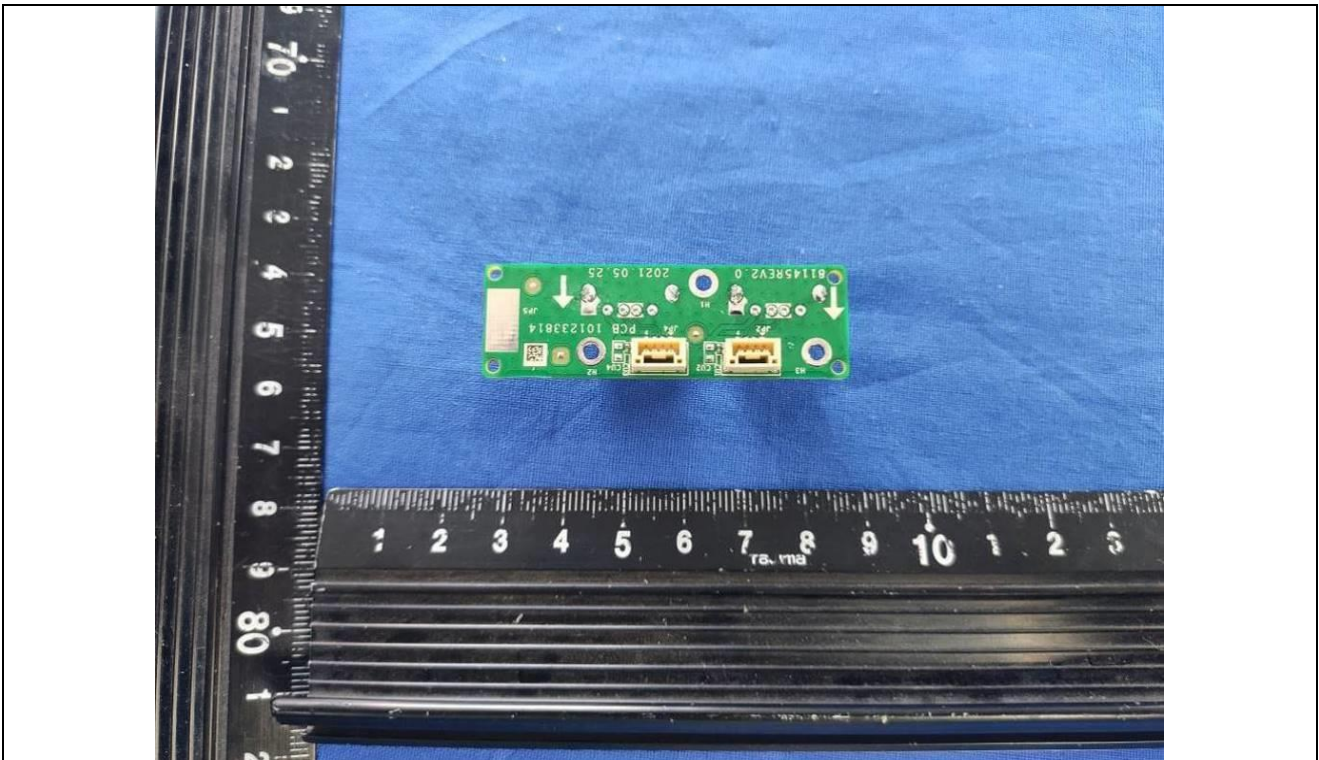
view (Model: DS-7732NI-M4/16P)
